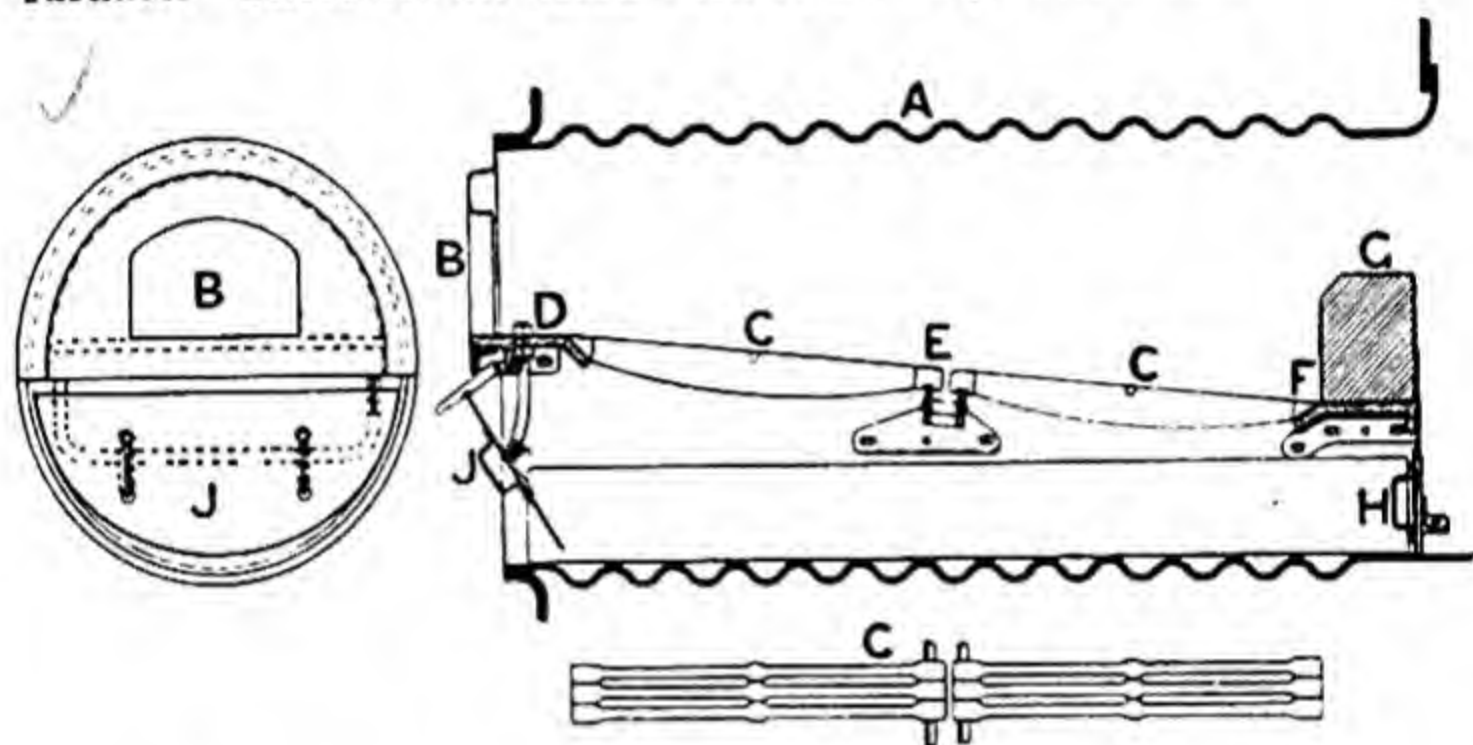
Front elevation and section of a marine furnace, with plan of some of the fire bars.
